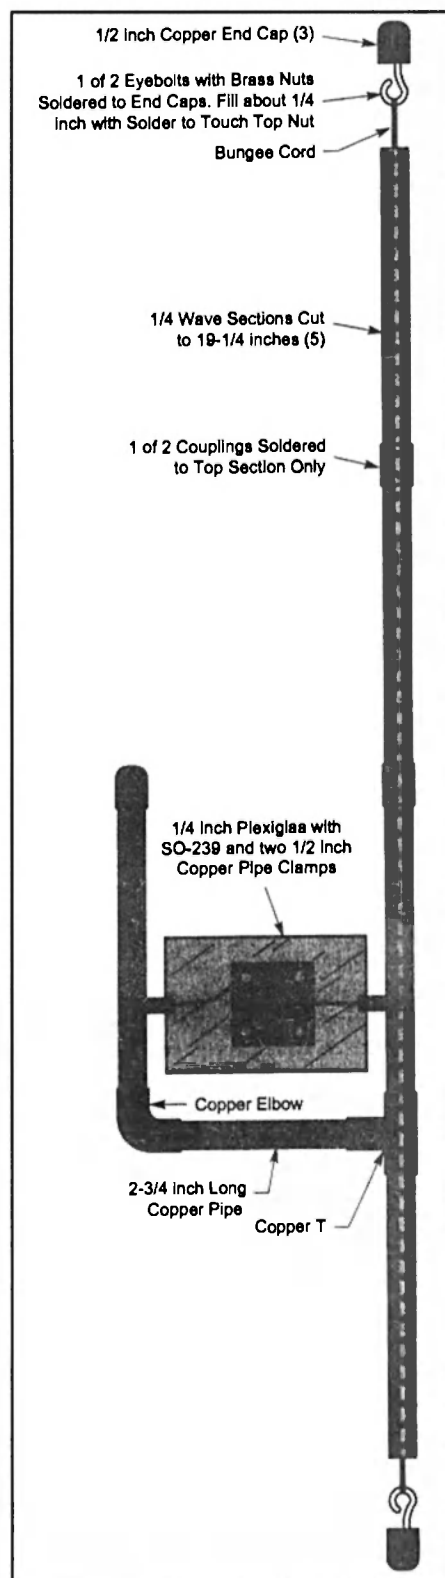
The assembly drawing for the VHF/UHF folding J-pole antenna
